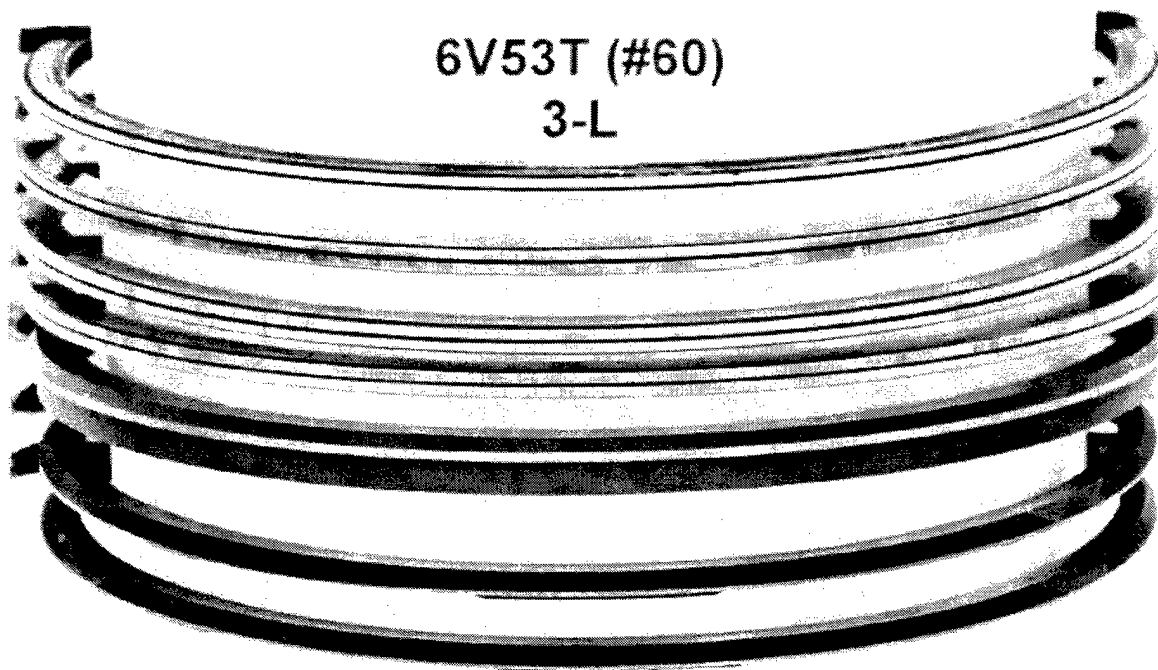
6V53T Test 60, Cylinder 3-L, Rings
